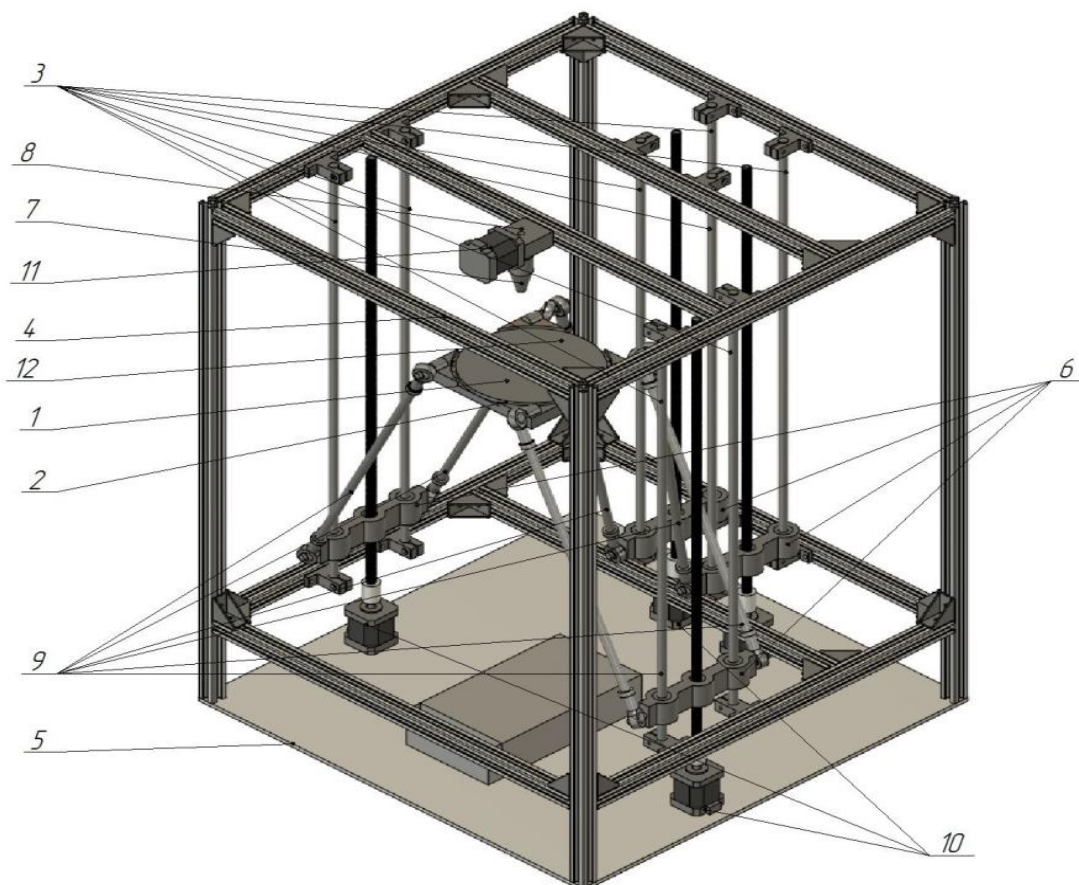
3D Delta printer: 1 – bottombase; 2 – top base; 5 – printing device; 13 – lead screw; 14 – leashes [8]
